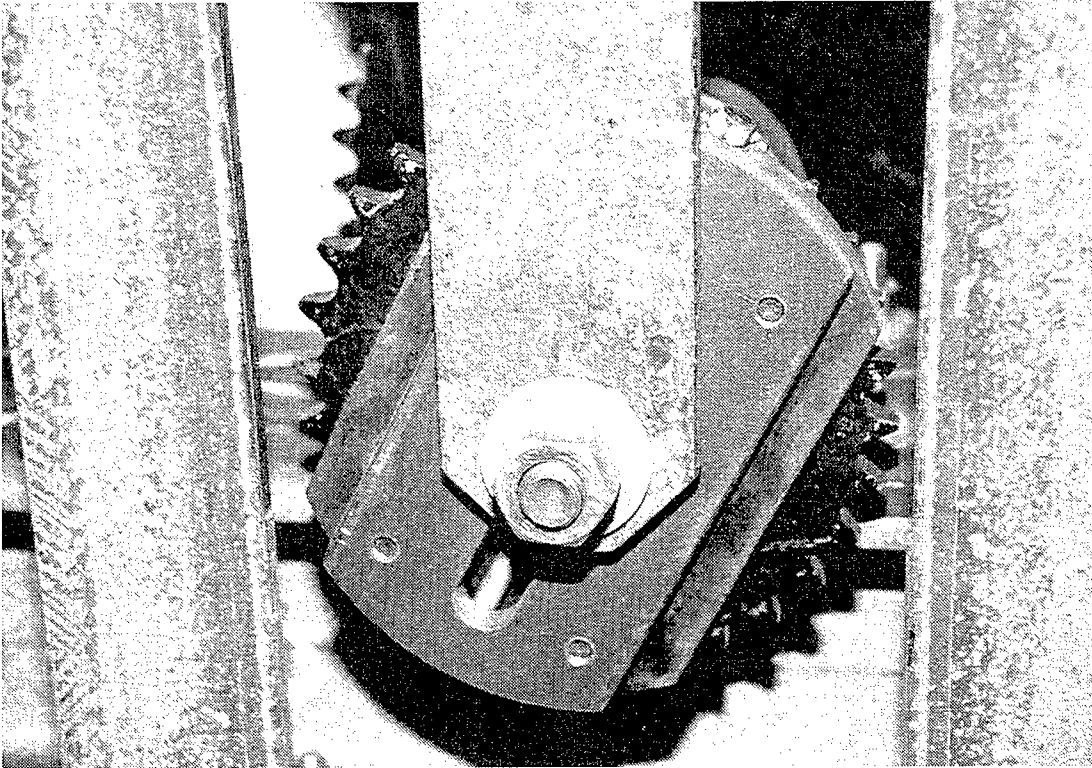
Close-up photograph of adjustable cam. Lower link is attached to cam and extends up to the slide mechanism (shown in Figure 2).
